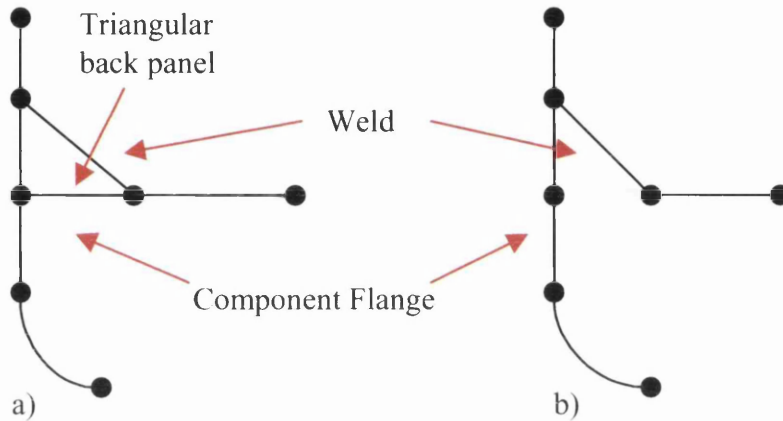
Weld FE Representation a) Triangular Weld, b) Standard Volvo Weld Representation
